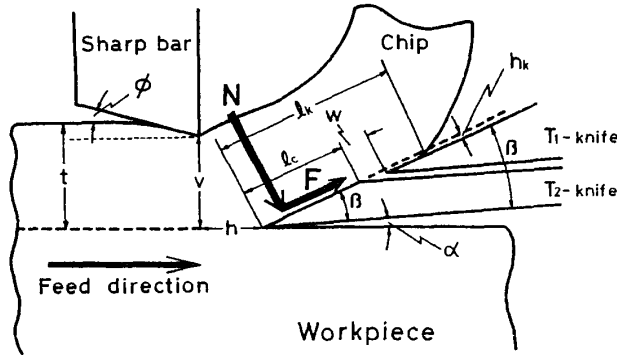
Geometry of veneer cutting with composite tool divided into two parts and technical terms used.
